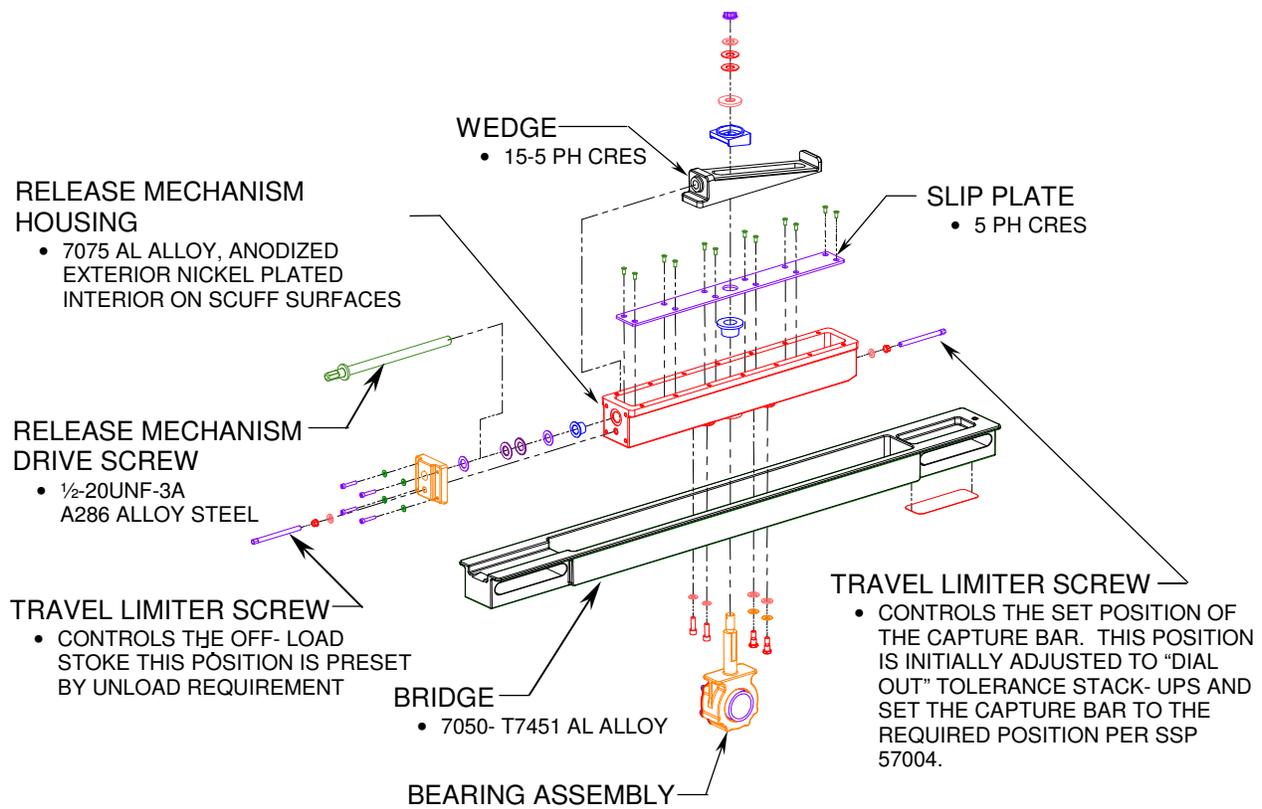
PAS Bridge Assembly and Load Release Mechanism
